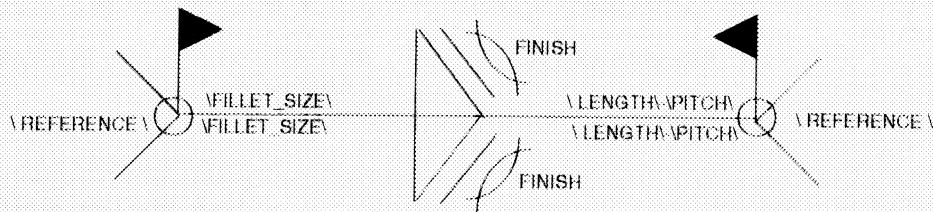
FIGURE A Generic Welding Symbol (Fillet Welding Symbol Shown)
